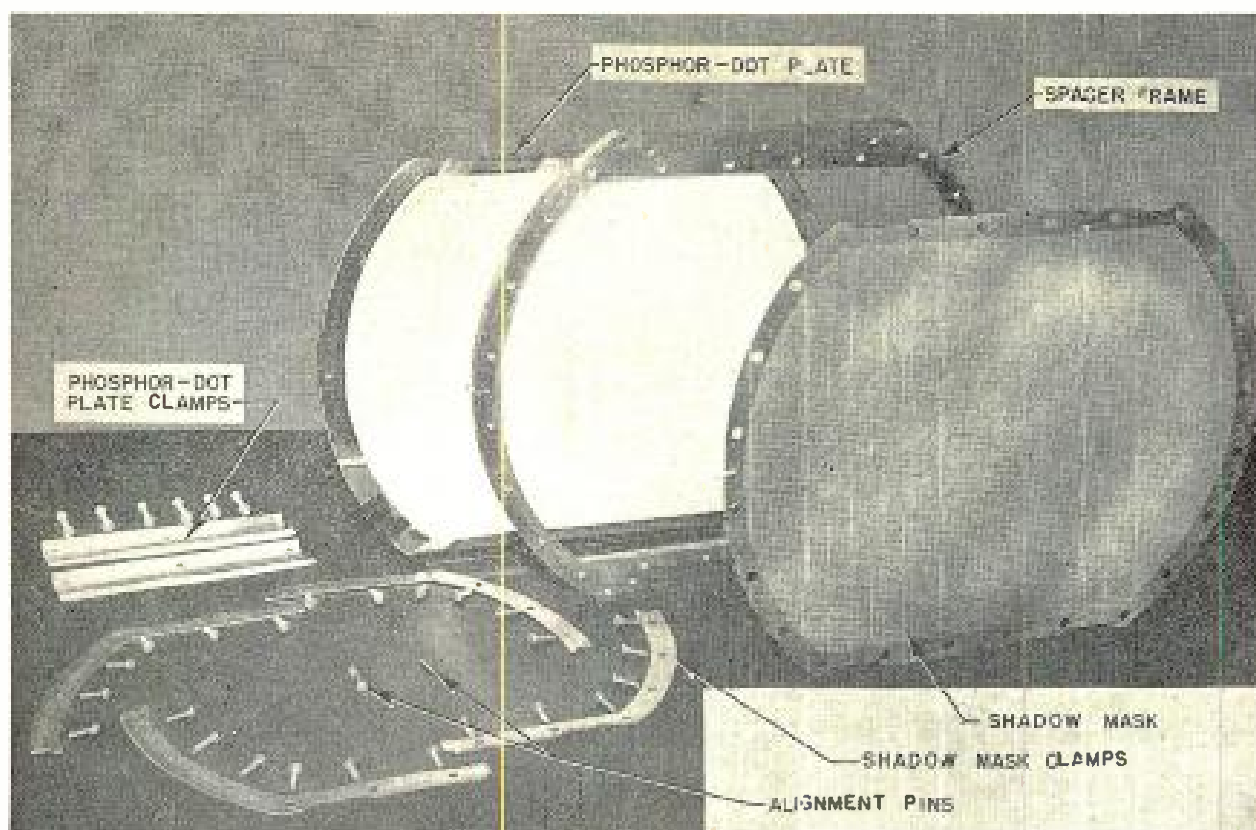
Exploded view of viewing-screen assembly — early design.
